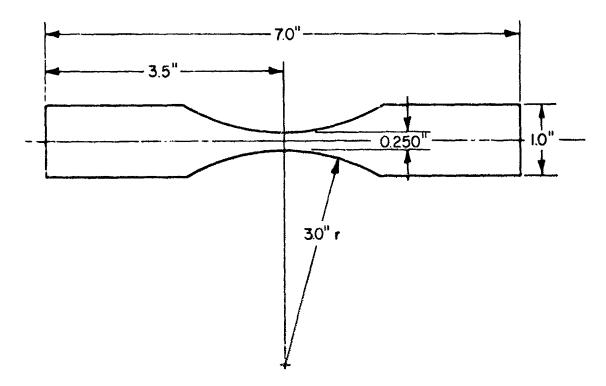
UNNOTCHED SHEET FATIGUE SPECIMEN
